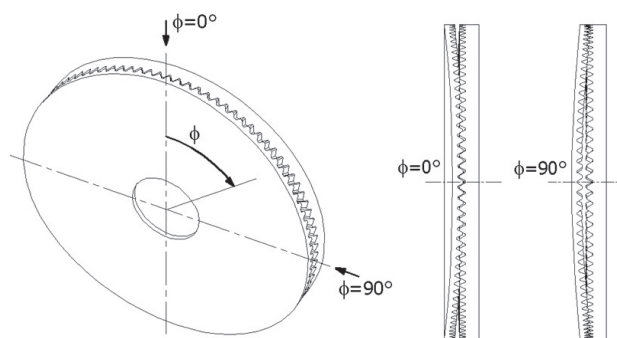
Schematic representation of the engagement in flat-wheel strain wave gearing
